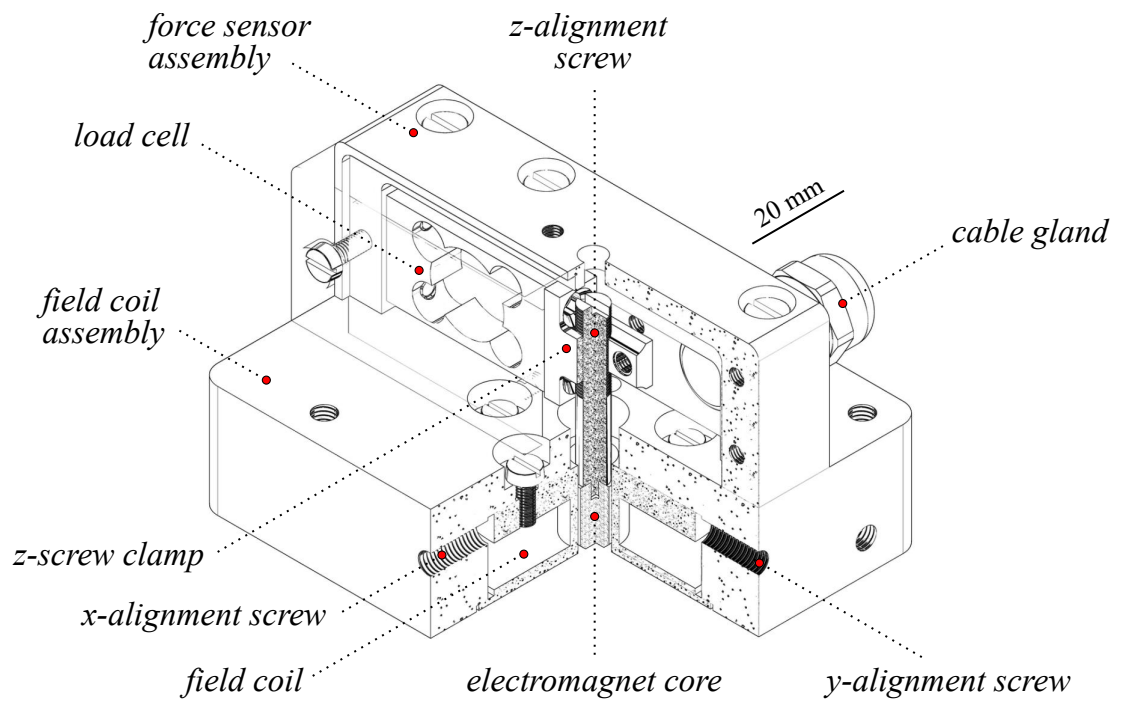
Balanced core magnetometer design in a handheld format (core section view).
